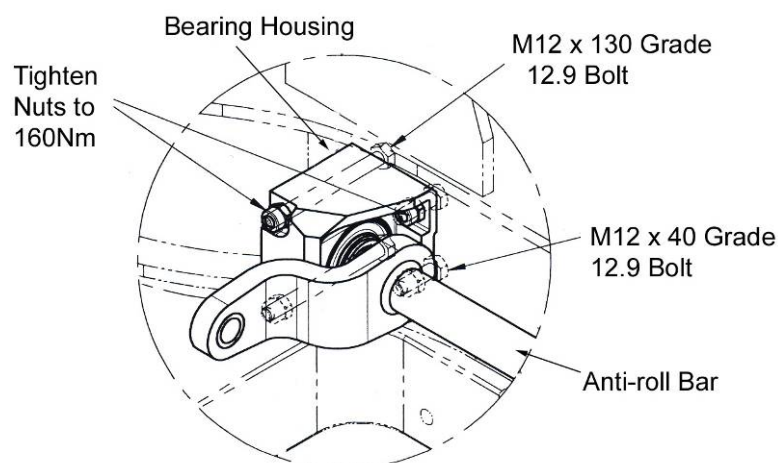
Assembly of Improved Anti-roll Bar Bearing Housings
